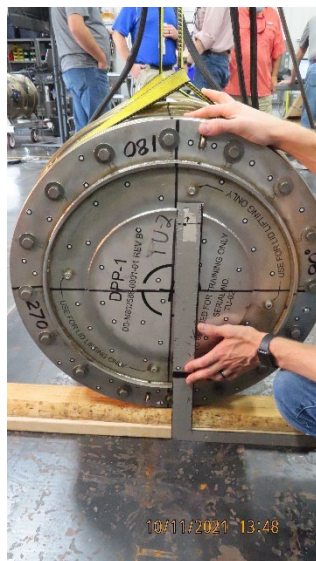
TU-2 Accel mounts weld.
